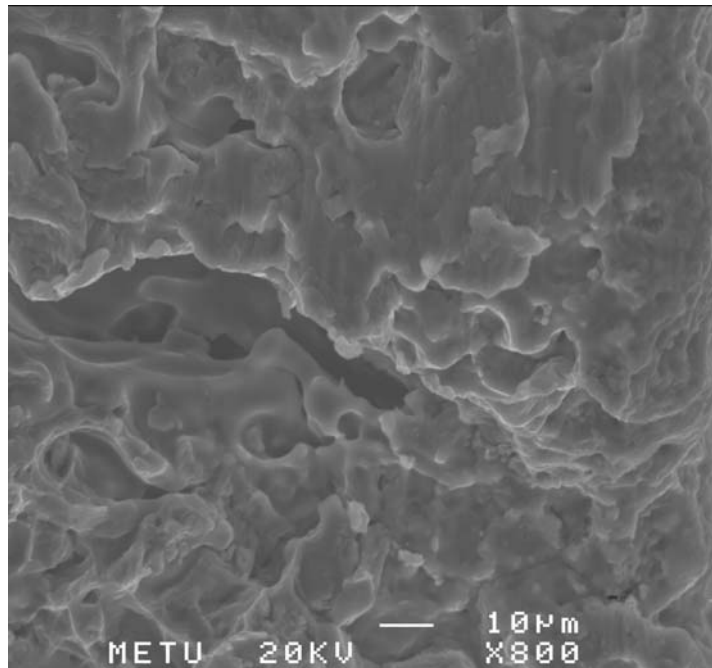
Fractography of a liquation crack of 7039-5183 aluminum alloy. The crack formation is intergranular
